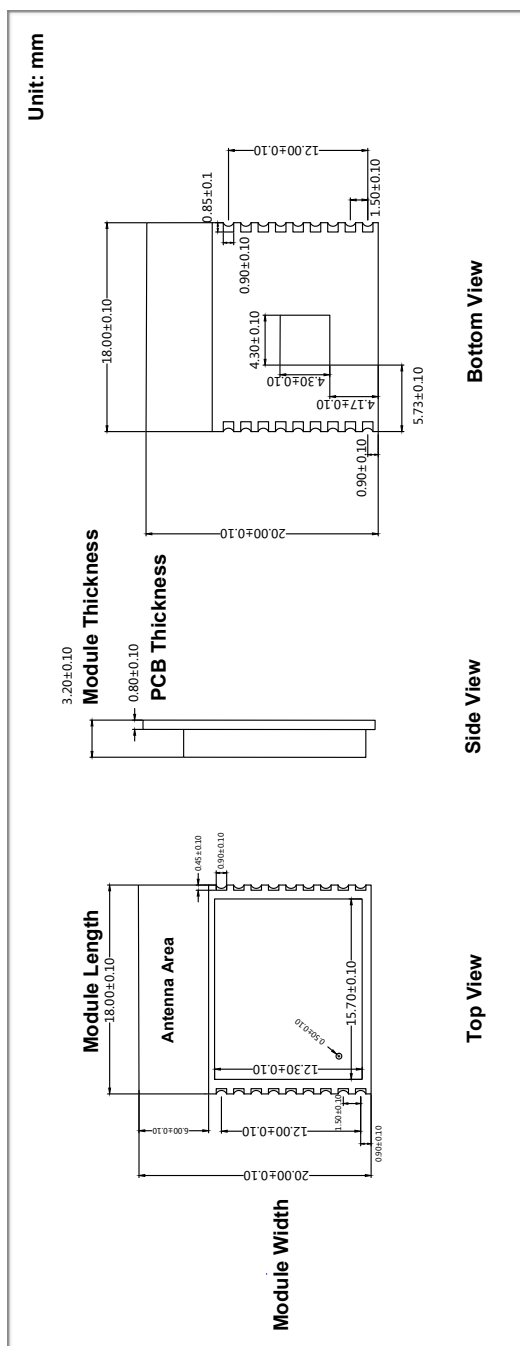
ESP-WROOM-02D/ESP-WROOM-02DC Dimensions
